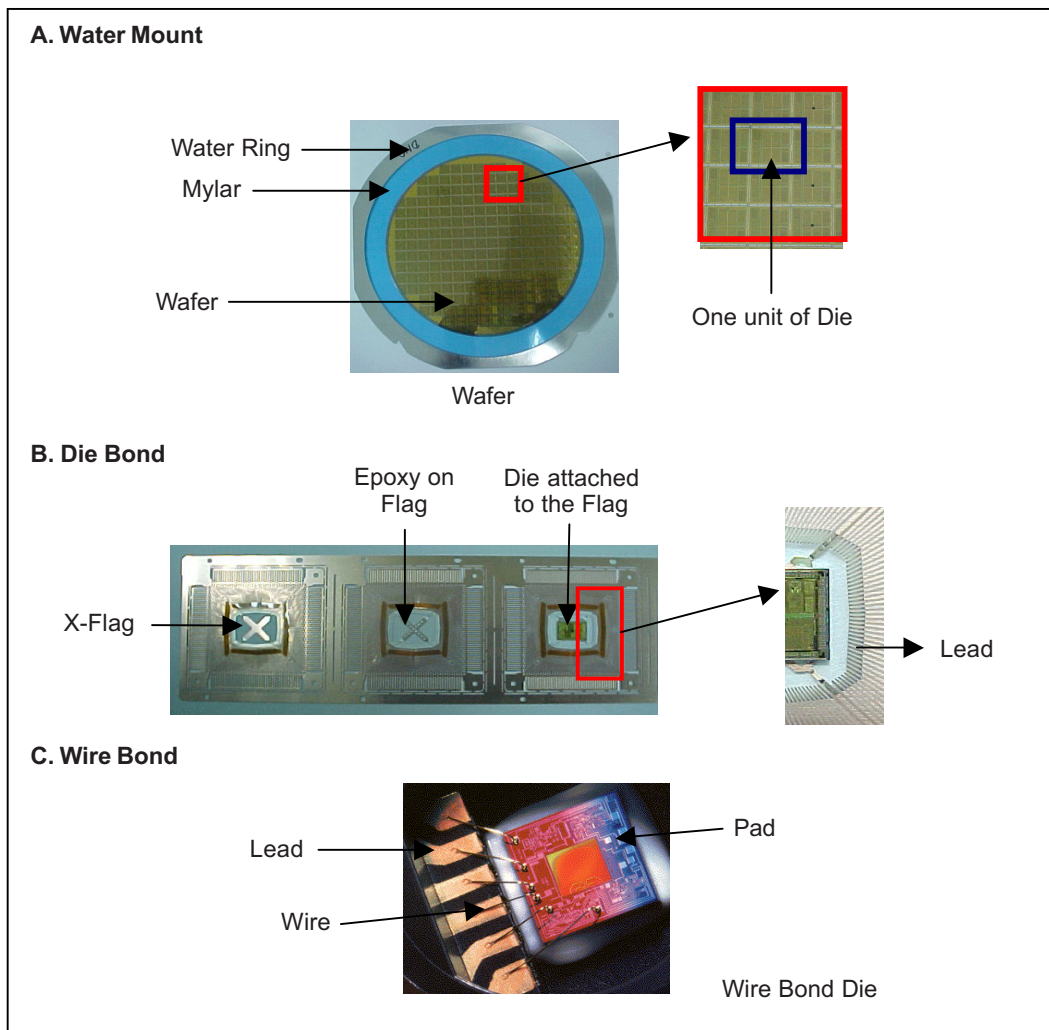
Basic Step in Front End Assembly: A. Wafer Mount, B. Die Bond, C. Wire bond
